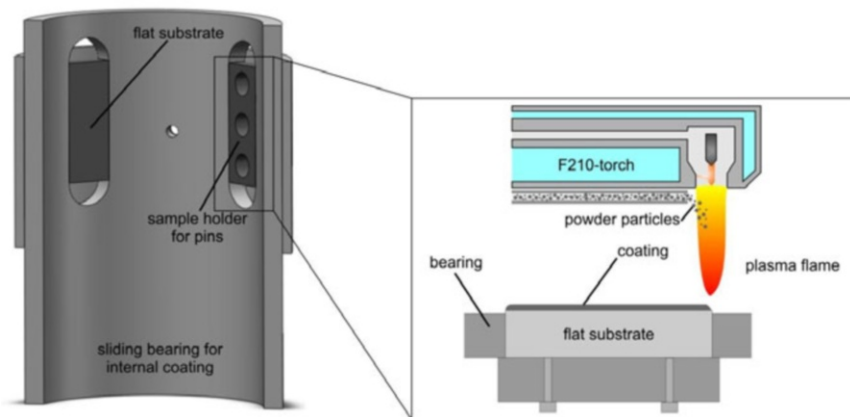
Scheme of a bearing with integrated sample holder (left) and schematic coating process of a flat testing sample (right)
